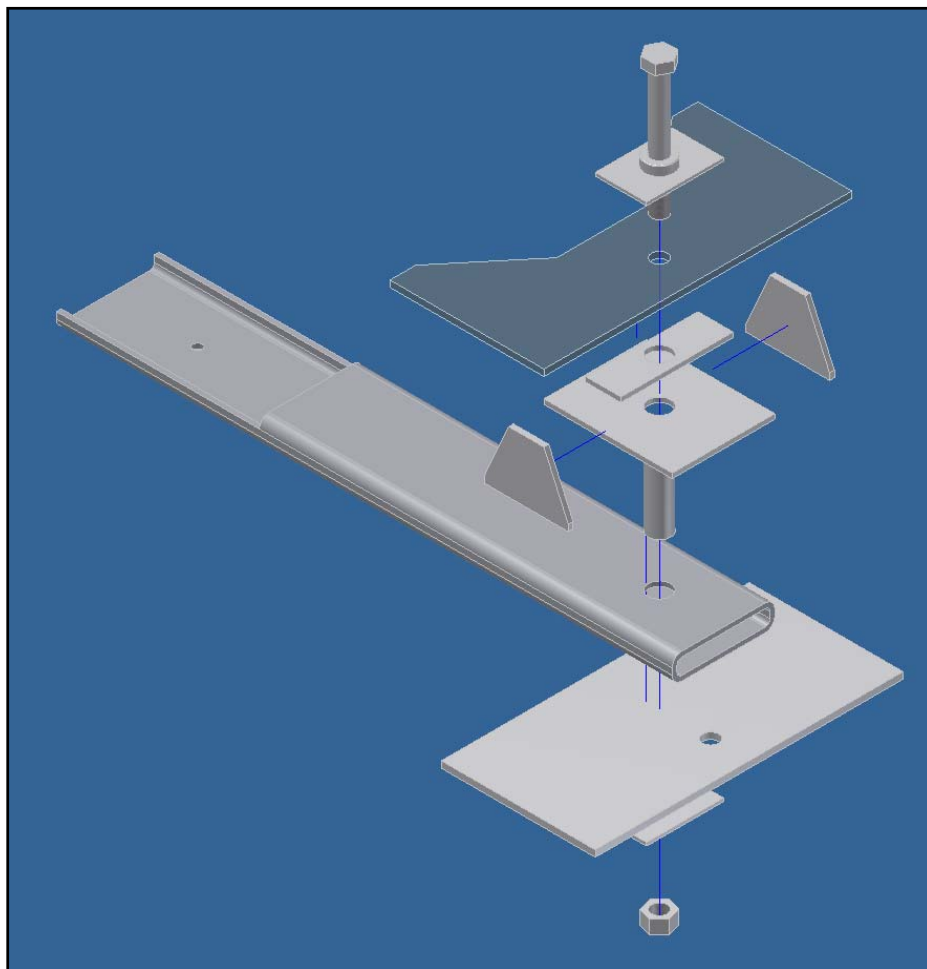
Carriage Assembly-Exploded View (Some Items Not Shown)
